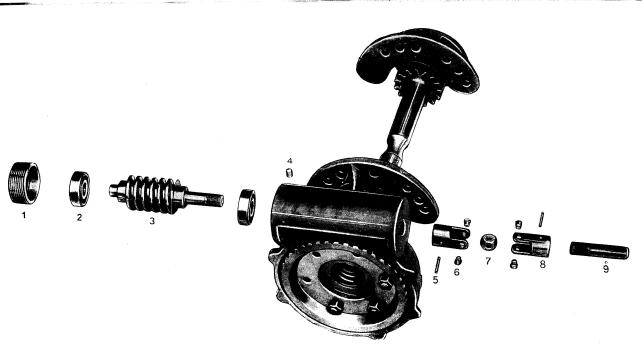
ELEVATING MECHANISM WORM — DISMANTLED
